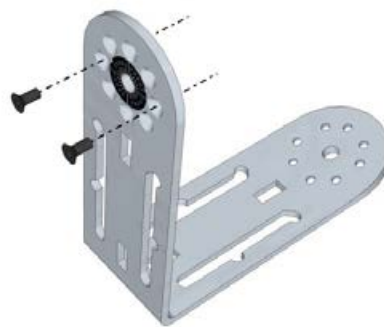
Assembly of BCL 900i and BT 900 using countersunk screws
